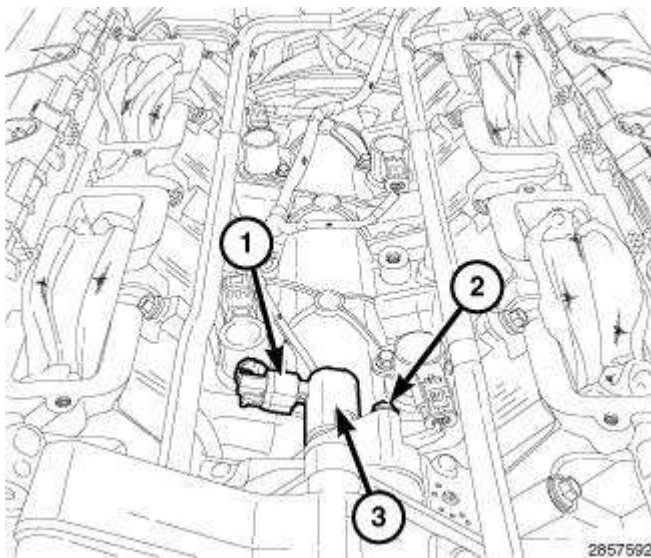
Oil Control Valve, Electrical Connector & Retaining Bolt
